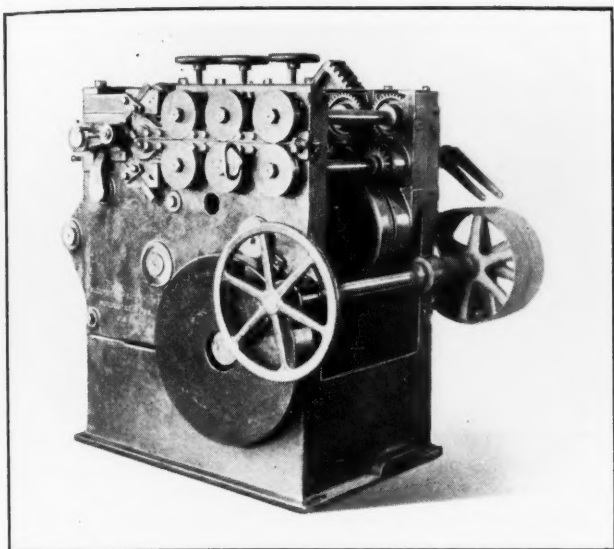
Sleeper & Hartley Segment-type Universal Spring Coiler
